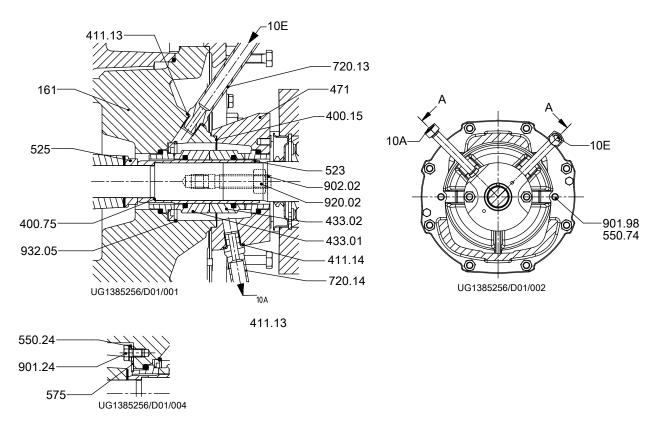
Variant with double mechanical seal in back-to-back arrangement
